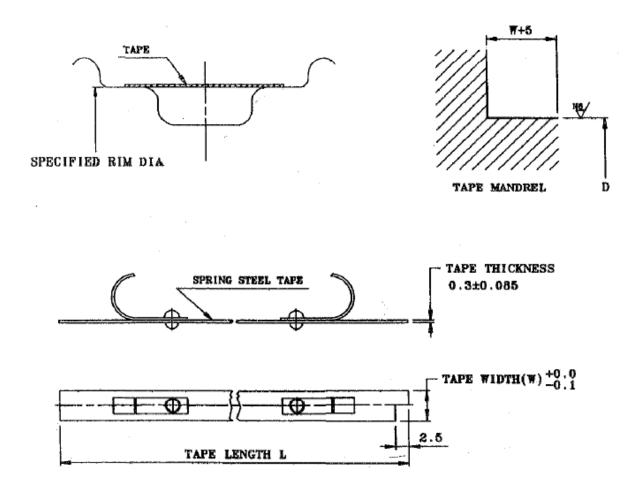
MEASUREMENT OF CYLINDRICAL BEAD SEAT RIM
